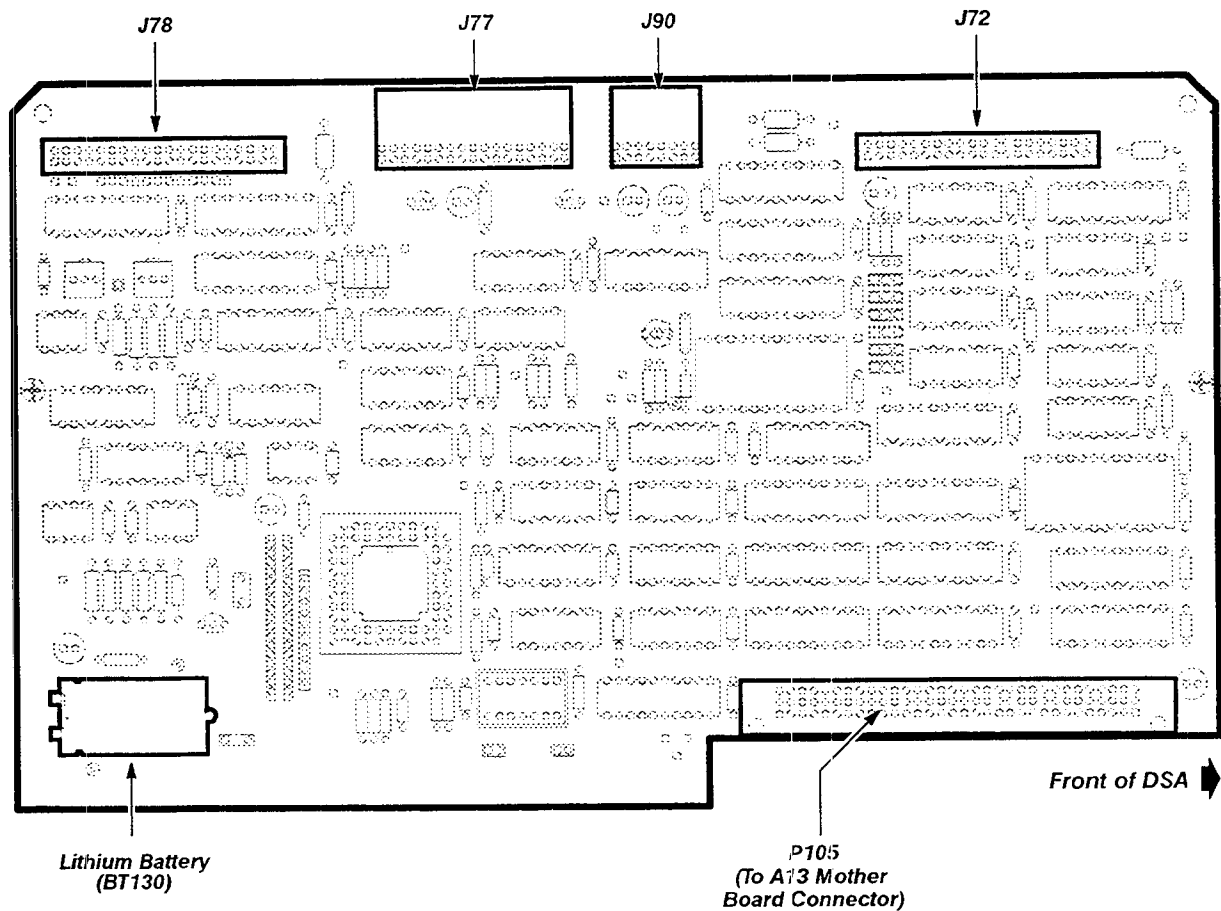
Removing/Replacing the A14 I/O Board
